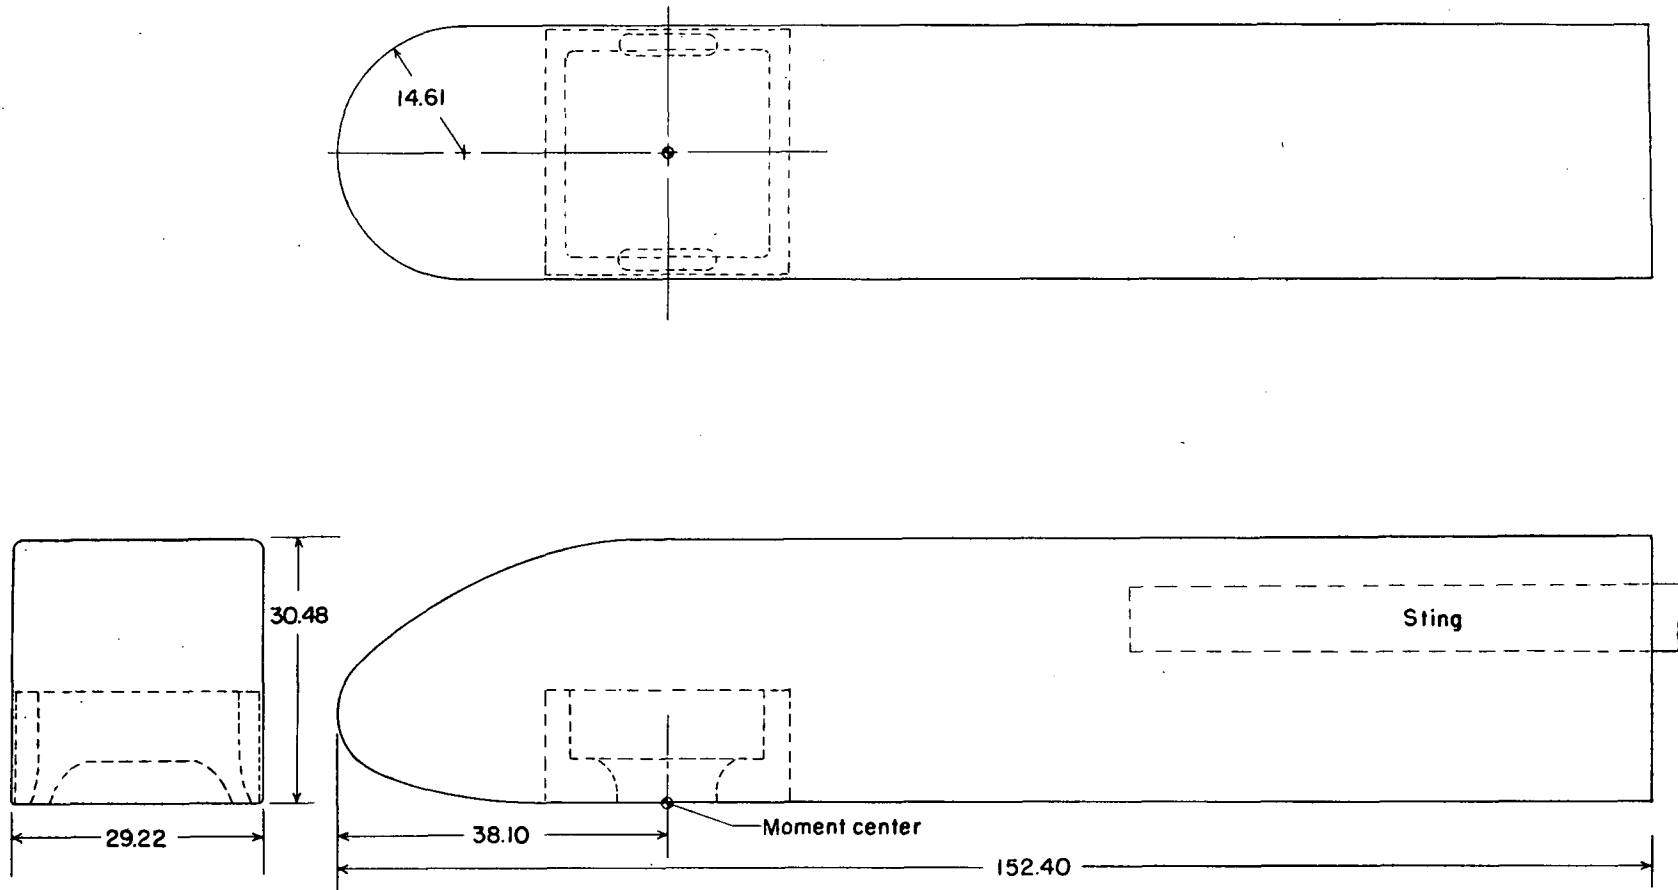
Three-view drawing of model showing removable nozzle block. Dimensions are in centimeters.
